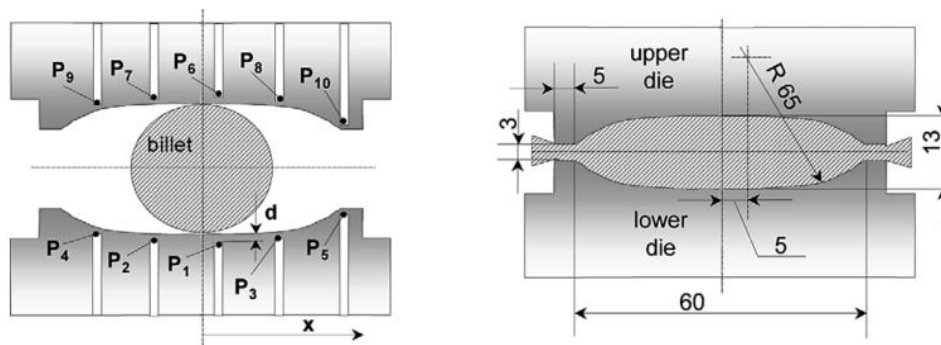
Closed die hot-forging of stainless steel turbine blades [85].
